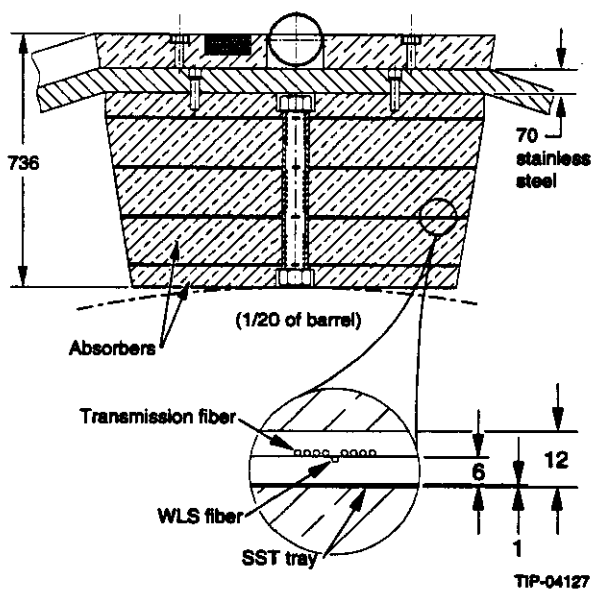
Details of scintillating barrel calorimeter module - end view.
